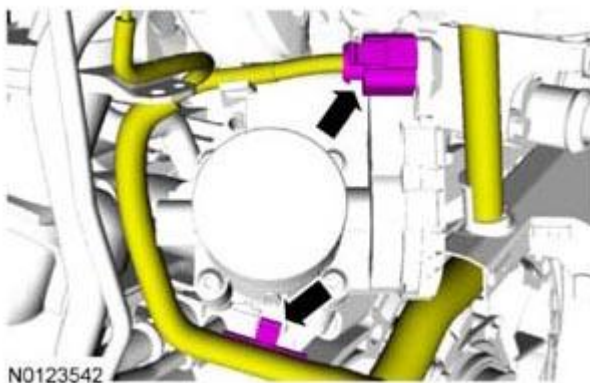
Locating Throttle Body (TB) Electrical Connector
